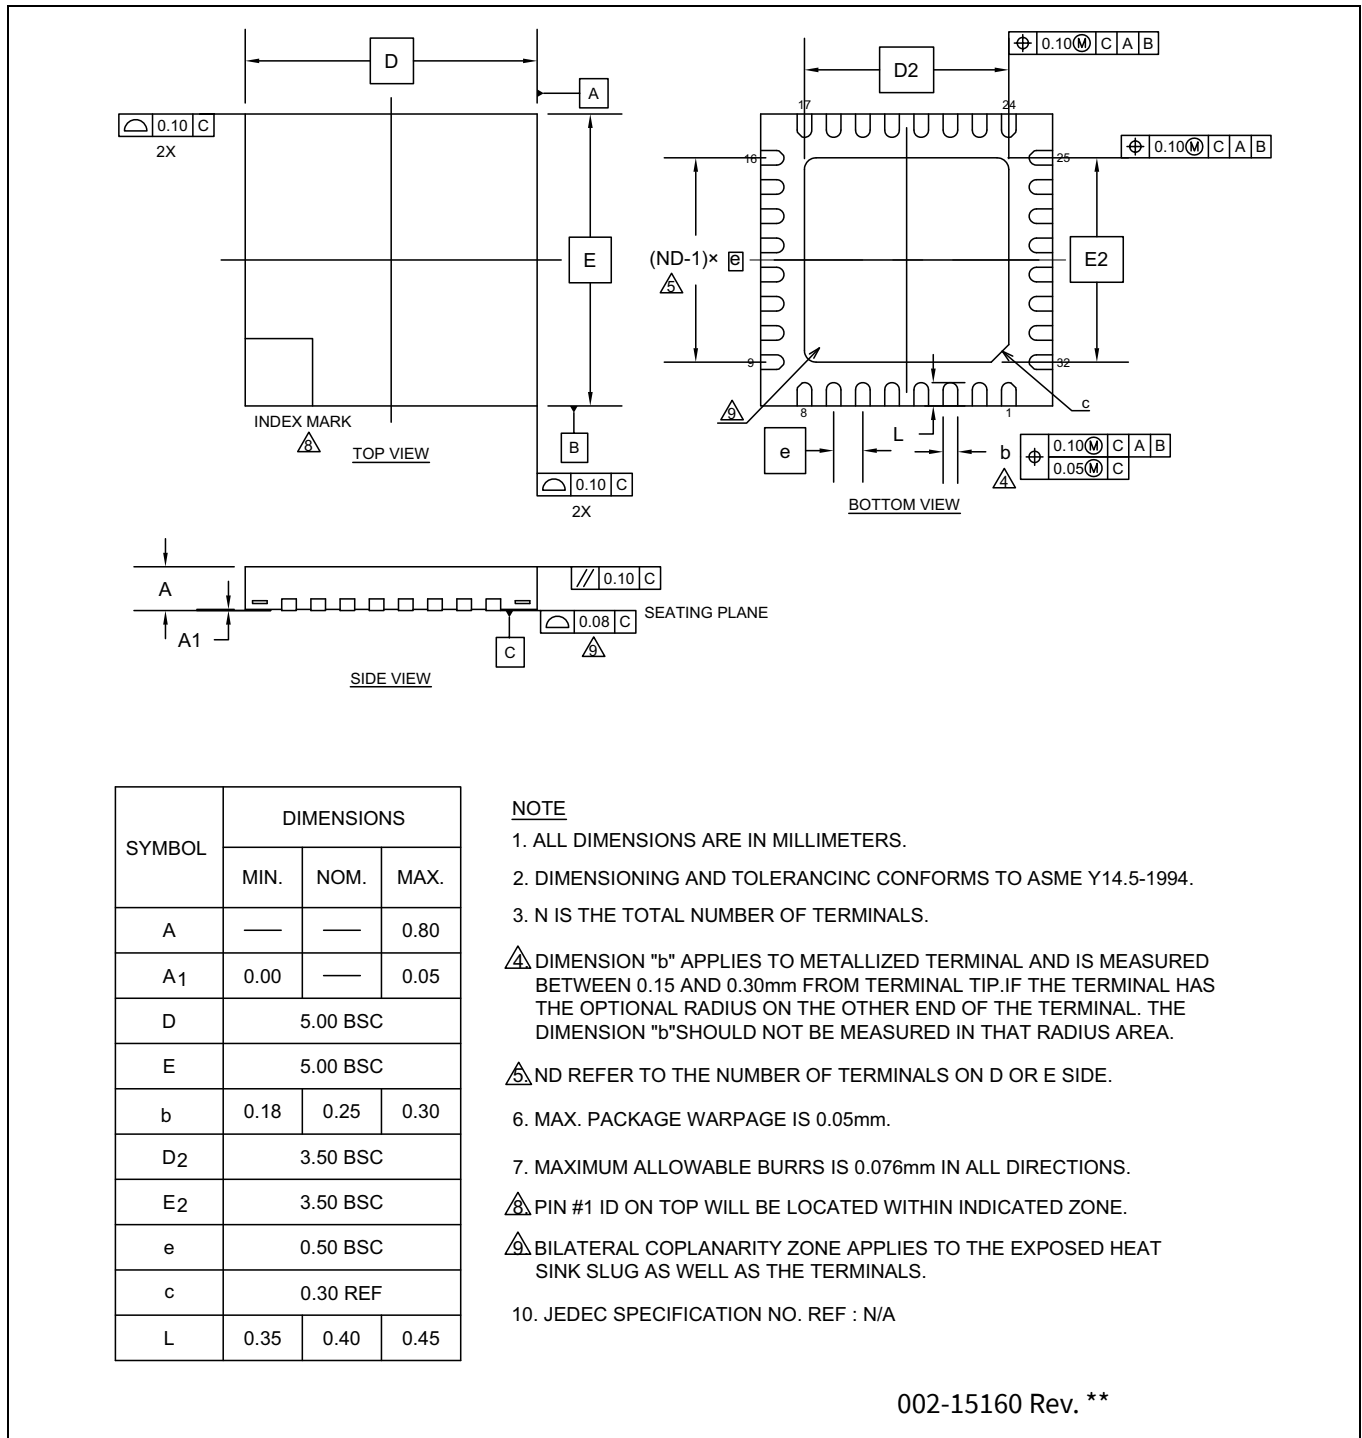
32-lead QFN ((5.0 × 5.0 × 0.8 mm) WNP032 3.5 × 3.5 mm E-Pad (Sawn)) package outline (PG-VQFN-32), 002-15160
